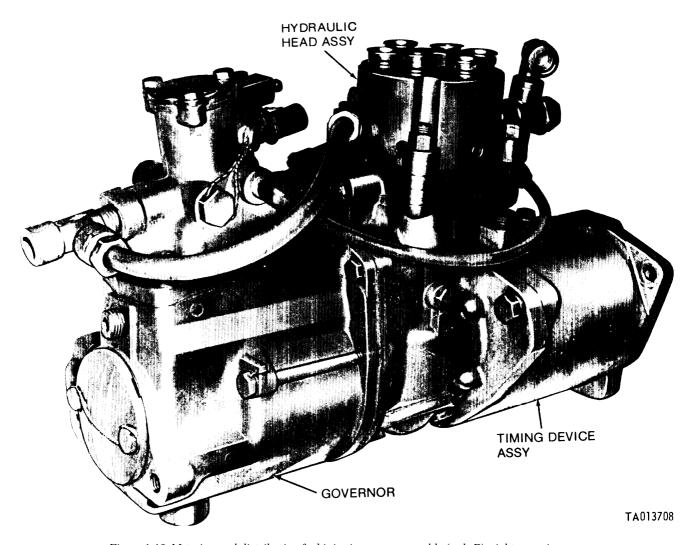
Metering and distributing fuel injection pump assembly (code B), left front view.
